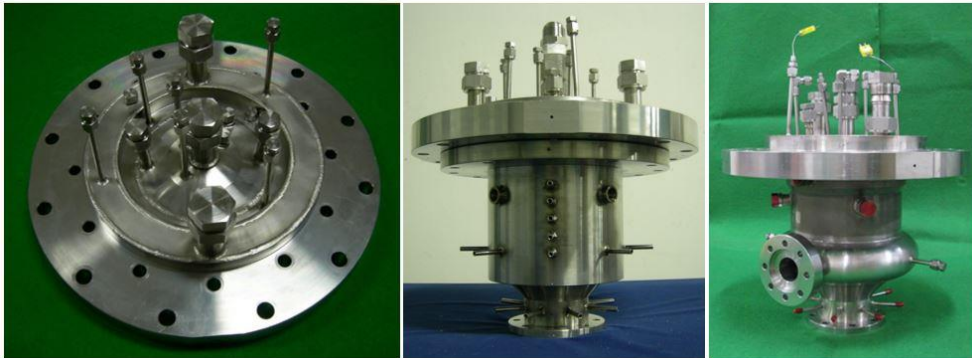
Full-scale technology demonstration model, (left) head assembly implemented with propellant injector, manifold and ignitor connecting port, (center) gas generator assembly with a dump cooling chamber, (right) gas generator assembly with a regenerative cooling chamber
